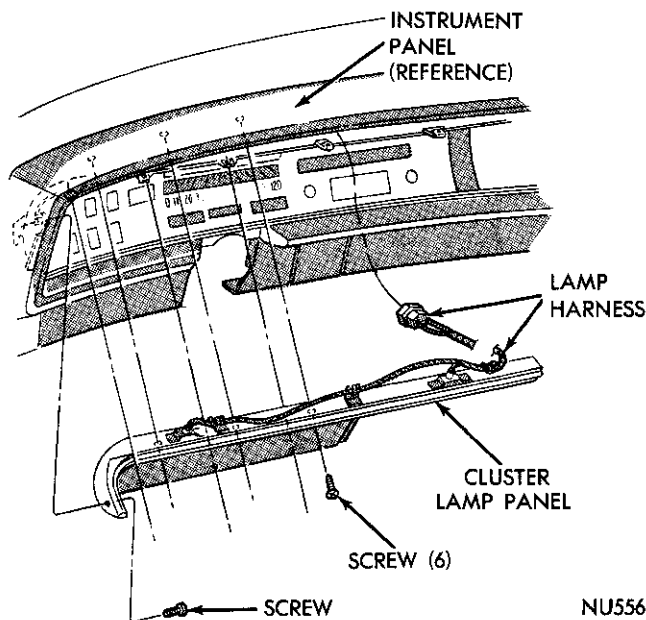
Lamp Panel—Removing and Installing—Chrysler
